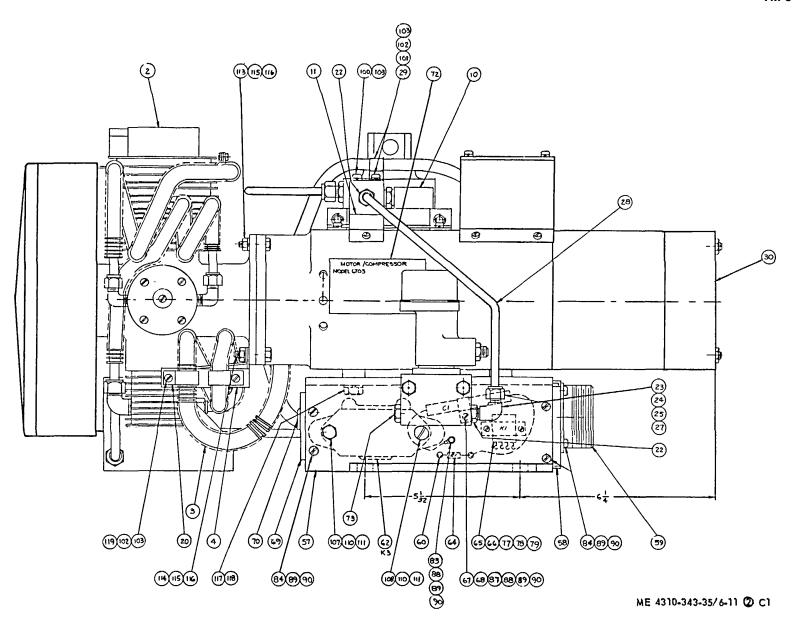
Motor-compressor assembly. Bogue Electric model 6703) (sheet 2 of 5)
